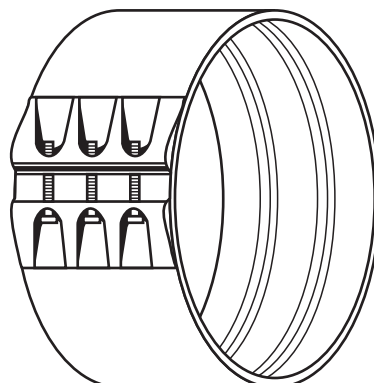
Loose Ring with flat gasket incl. steel support
